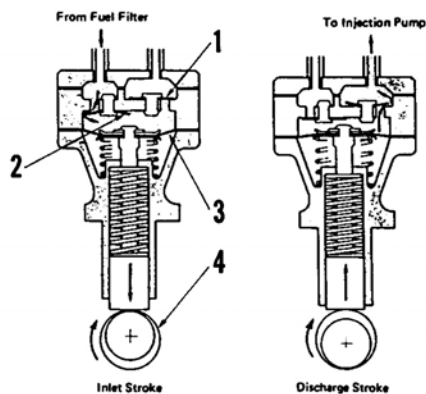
A—Cross-sectional views of fuel pump showing operation on inlet and discharge stroke.
